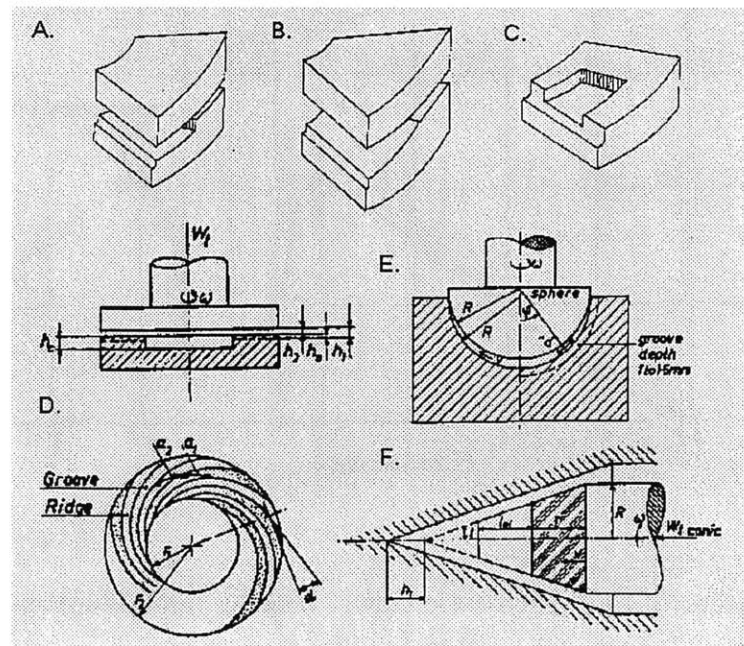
Other kinds of self-acting thrust bearings (adapted from [42, 55]): A. Taper-land, B. Step, C. Pocket, D. Spiral Groove, E. Spherical, F. Conical spiral groove.
